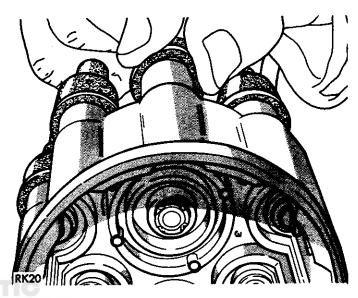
Spark Plug Cable to Distributor Cap Installation
